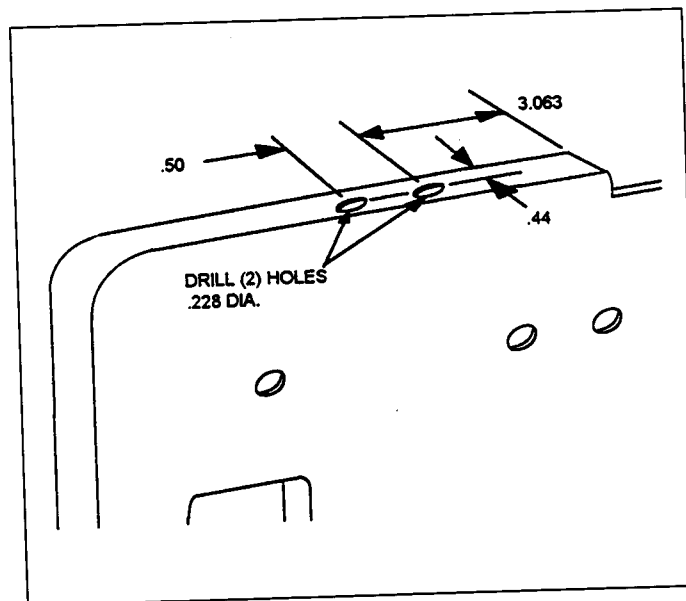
Programmer Disconnect Bracket Mounting Holes
